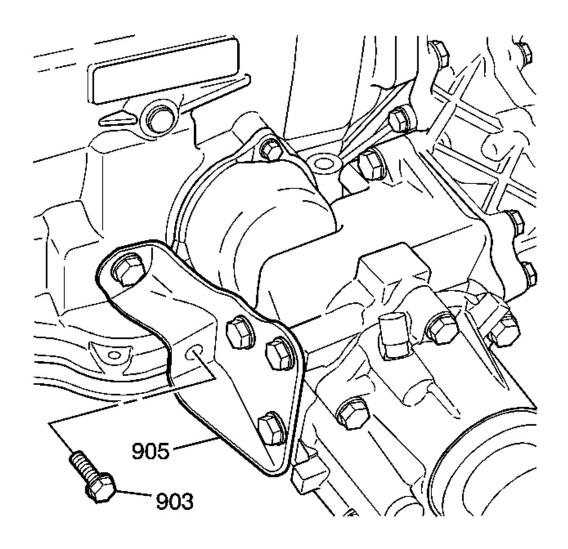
Locating Transfer Case Side Brace & Bolts Courtesy of GENERAL MOTORS CORP.
